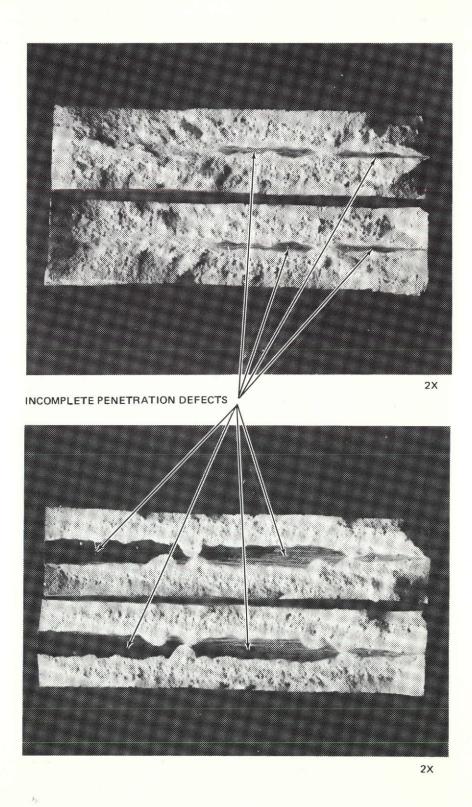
Fracture Surfaces of Two Tensile Specimens Taken from Zone of Incomplete Penetration on Panel 135136
